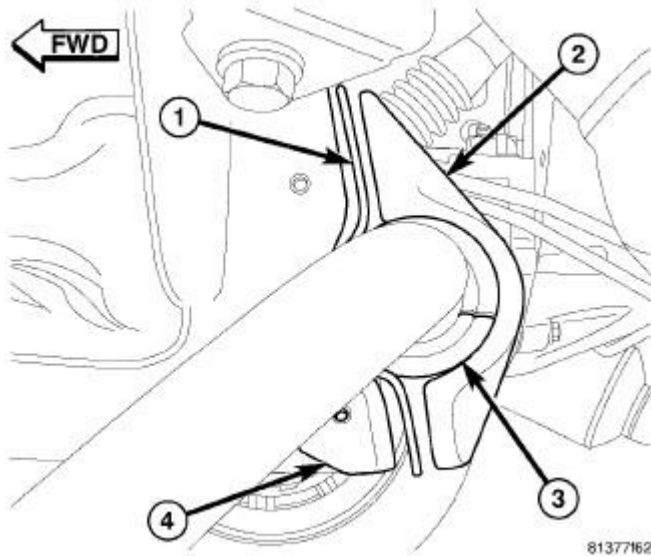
FRONT STABILIZER BAR BUSHING RETAINER
